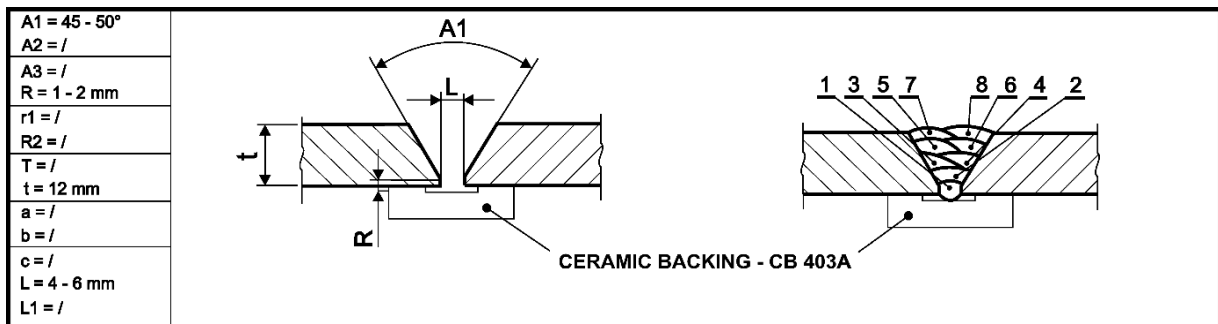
Welding preparation parameters with welded layers' scheme
